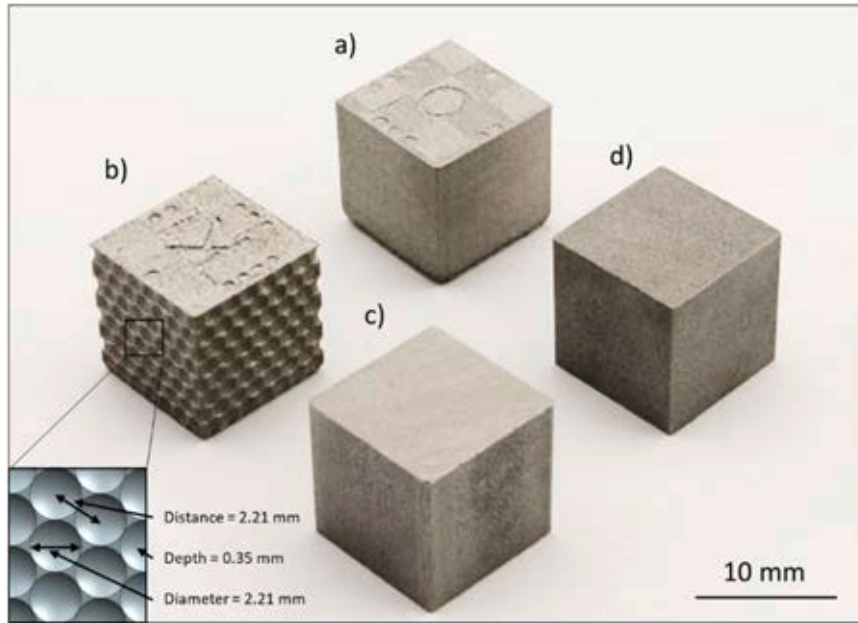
Shear test samples: (a) L-PBF flat surface, (b) L-PBF textured surface, (c) blank steel, and (d) blank steel corundum-blasted surface. The inset includes the geometric dimensions of the dimpled texture.
